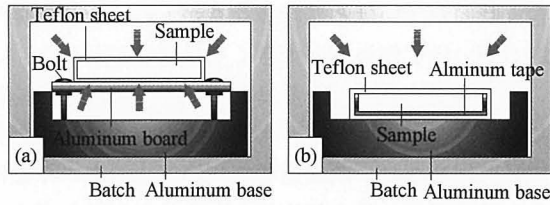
Foaming method of molds foamed surface layer ; (a) Both surface layer, (b) One surface layer.
